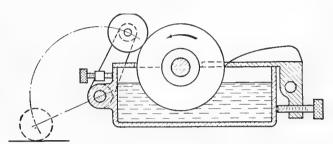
In the indirect types of film applicator, a transfer wheel receives glue from the main wheel and transfers it to the point of application. The clearance between the transfer wheel and the main wheel is usually made adjustable. On machines that must be stopped frequently, the drive to the glue wheels should be independent of the drive for the main machine so that the glue wheels can be kept revolving when the machine is stopped, thus preventing the glue from drying on the surface of the wheels.
